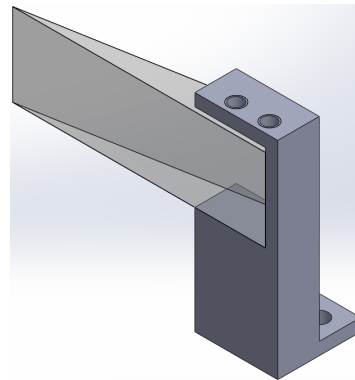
CNC part design to hold the fixed glass wedge.
